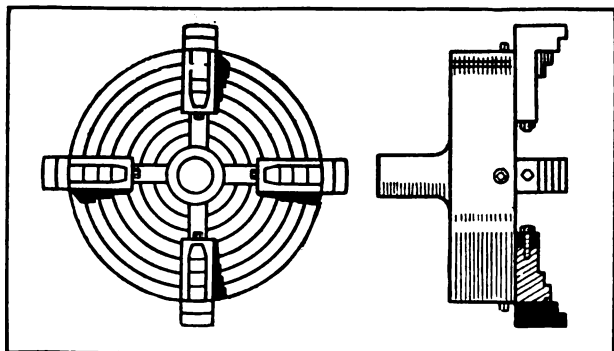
Suggestion for Enlarging Capacity of Lathe Chuck by Fitting Additional Jaws.
